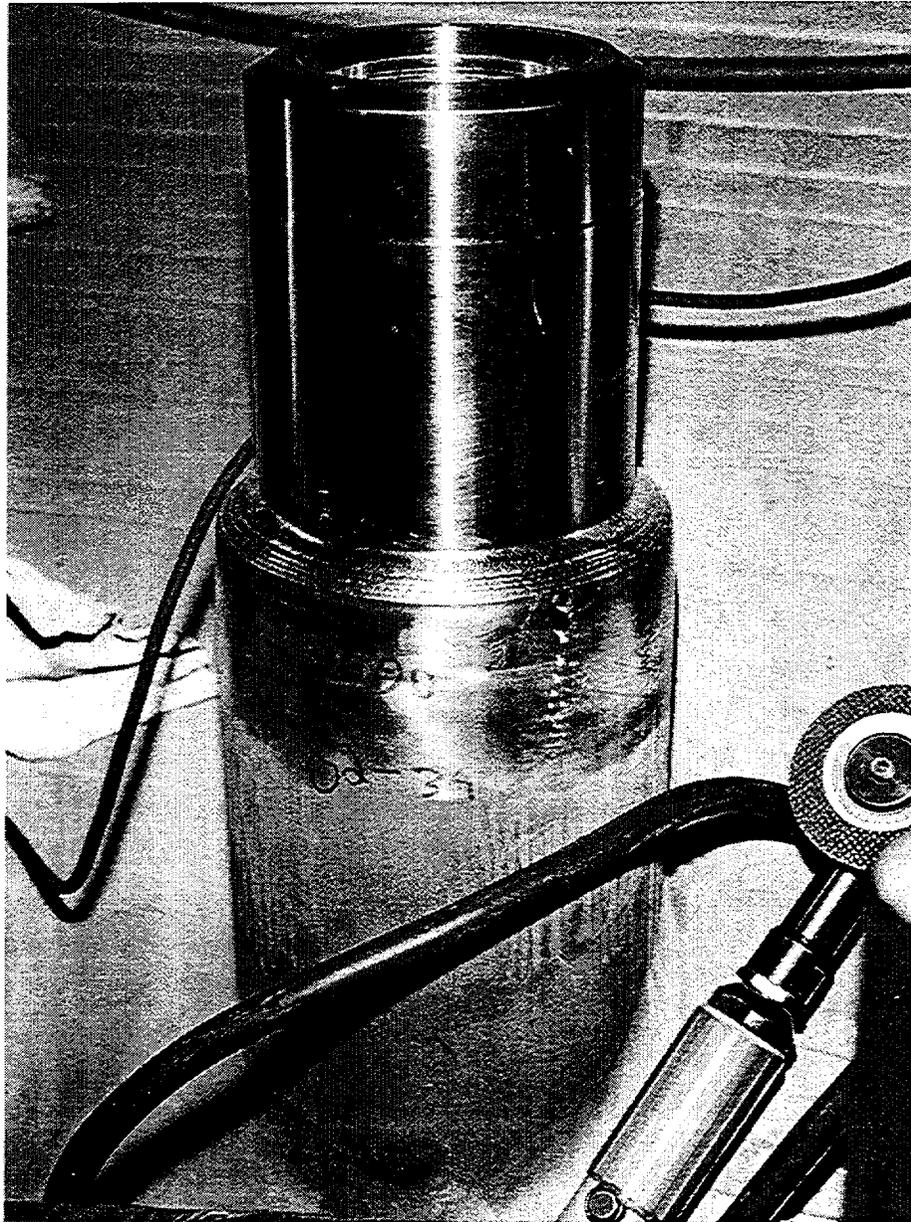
Weld holding control rod drive housing in place within stub tube at Peach Bottom
